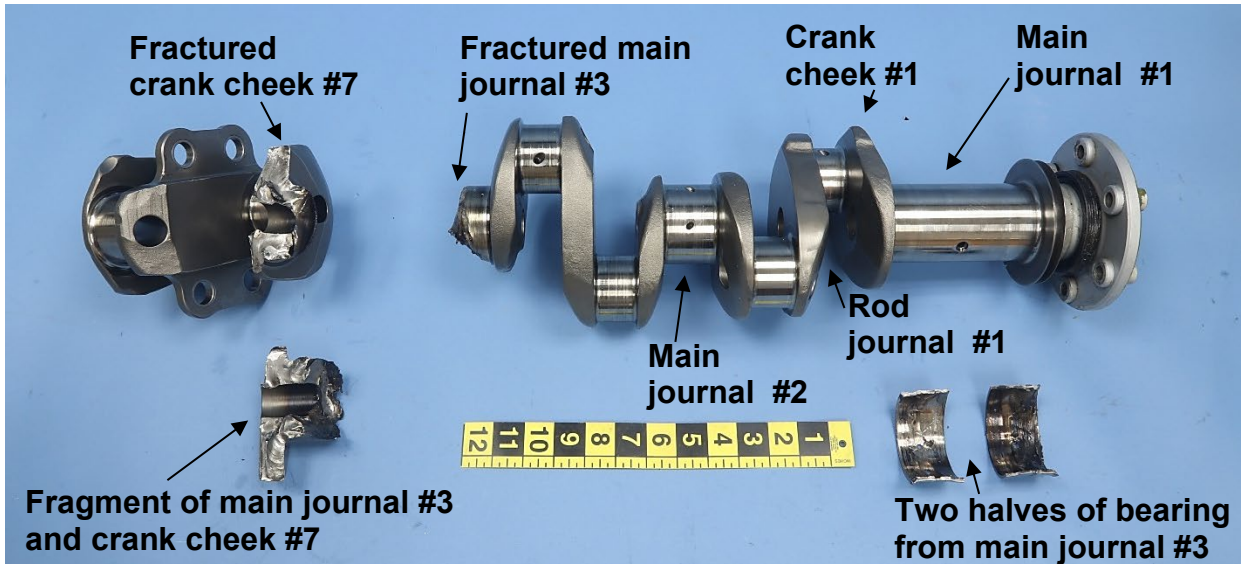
As-received crankshaft and two halves of bearing from main journal #3.
